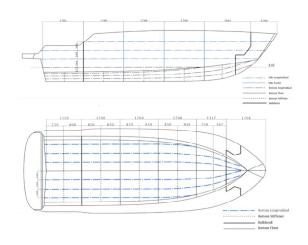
Structure layout of 11 m sandwich-structure yacht.
